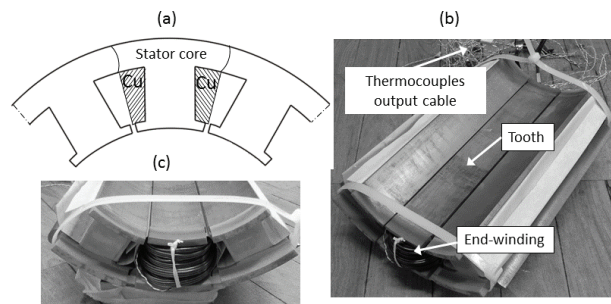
Outline of the high-speed PM machine laminated stator core section (a), prototype of three-tooth stator section with a single tooth wound (b), and end-winding view (c)
